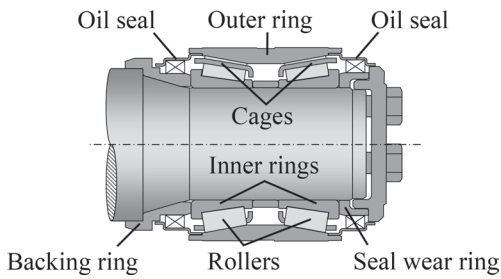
Schematic diagram of a railway axle journal tapered roller bearing
